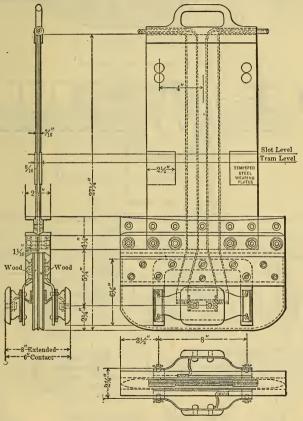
CONSTRUCTION OF PLOW FOR UNDERGROUND CONDUIT.
